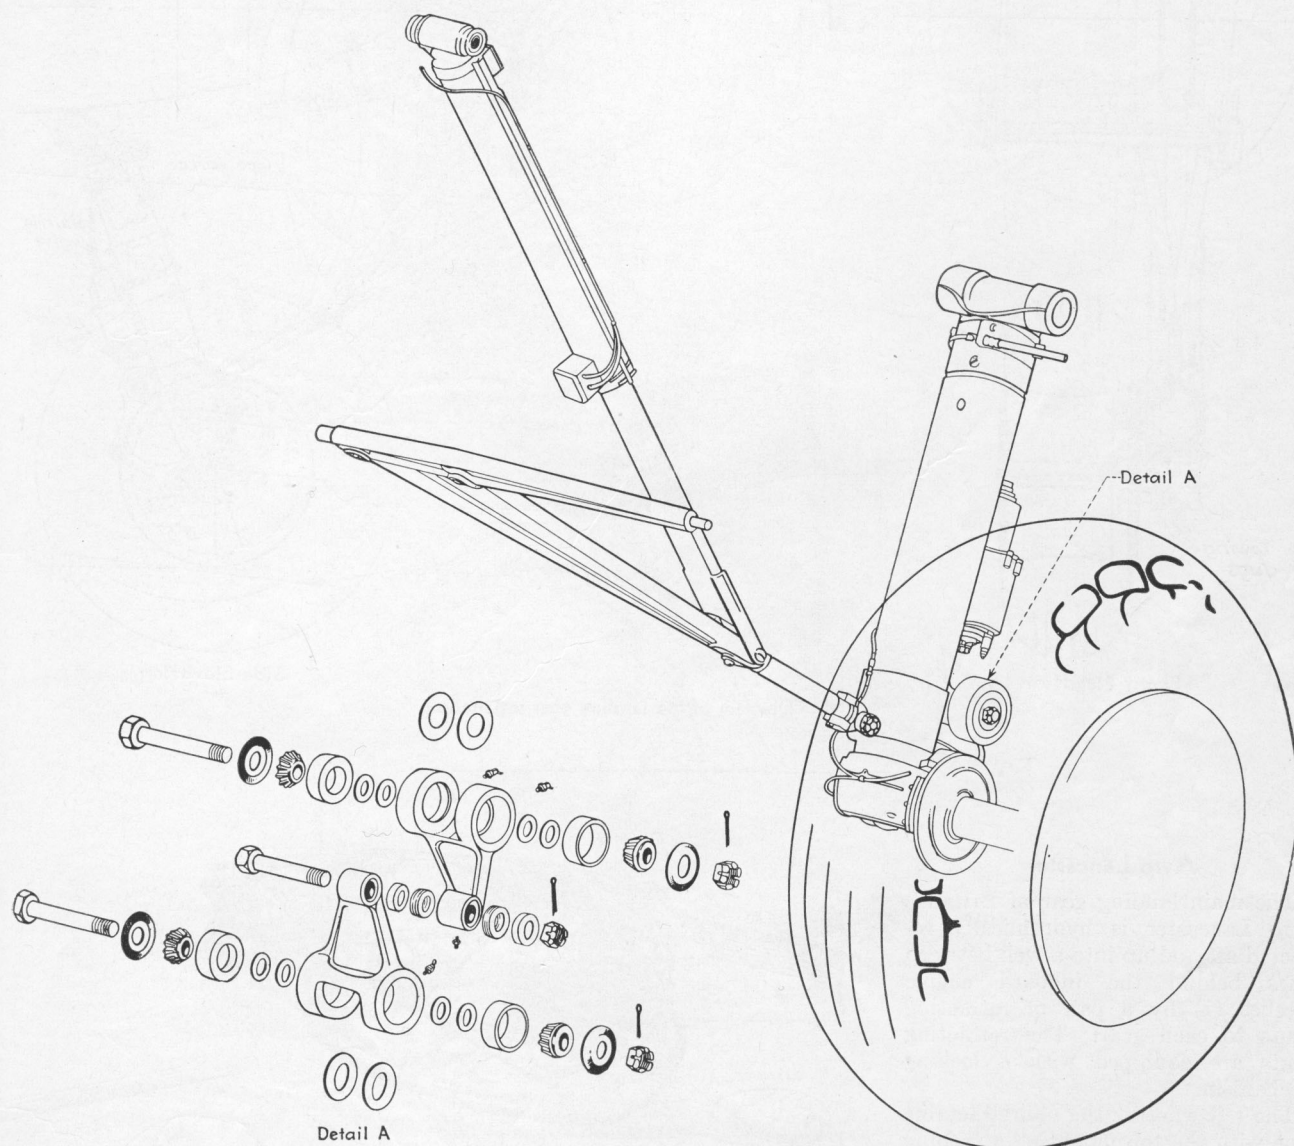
Landing gear and brake installation. Detail A shows an exploded aspect of the torsion link assembly.
